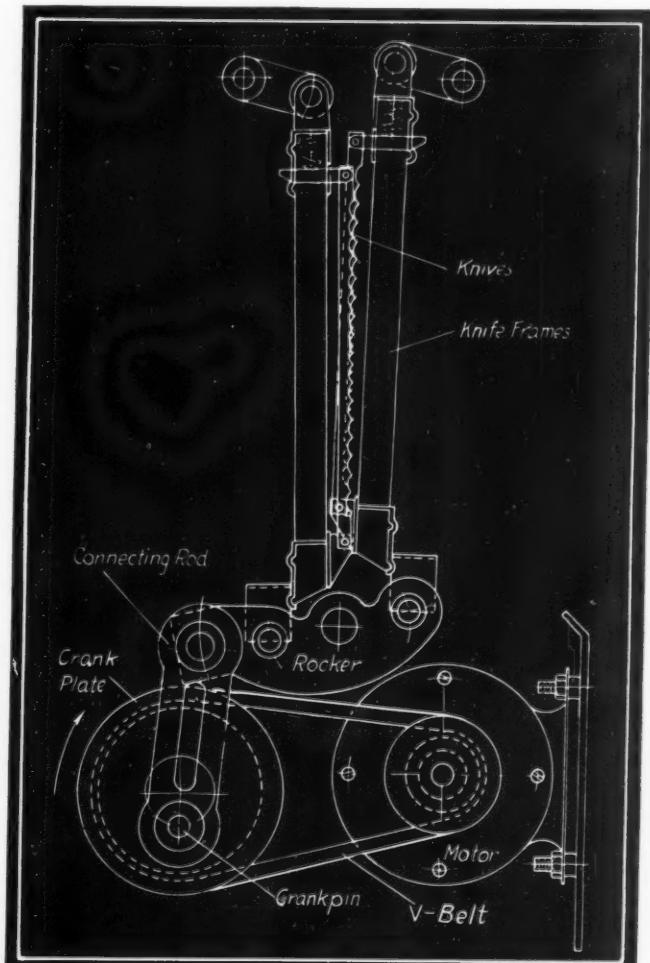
Oliver knife frames do not move in a straight line. The design illustrated makes possible the use of ball bearings at all moving points
